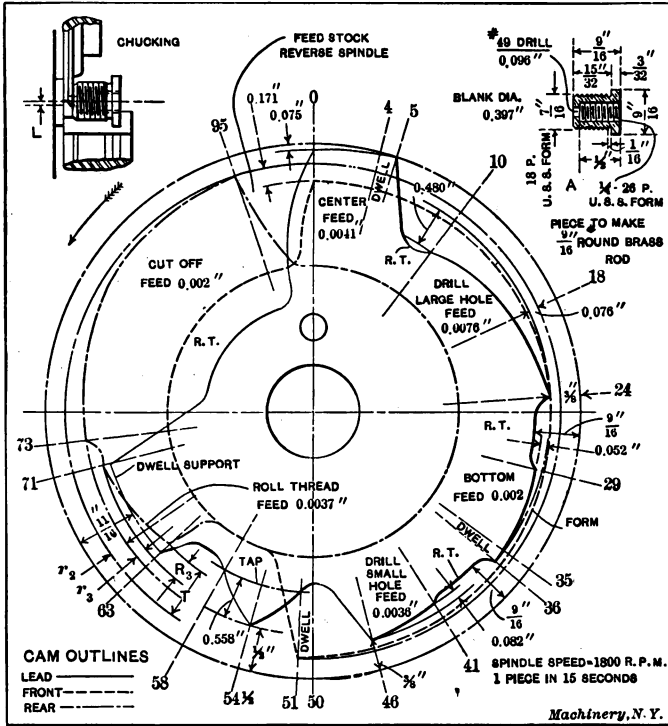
Lay-out of a Set of Cams for Performing a Thread-rolling Operation
